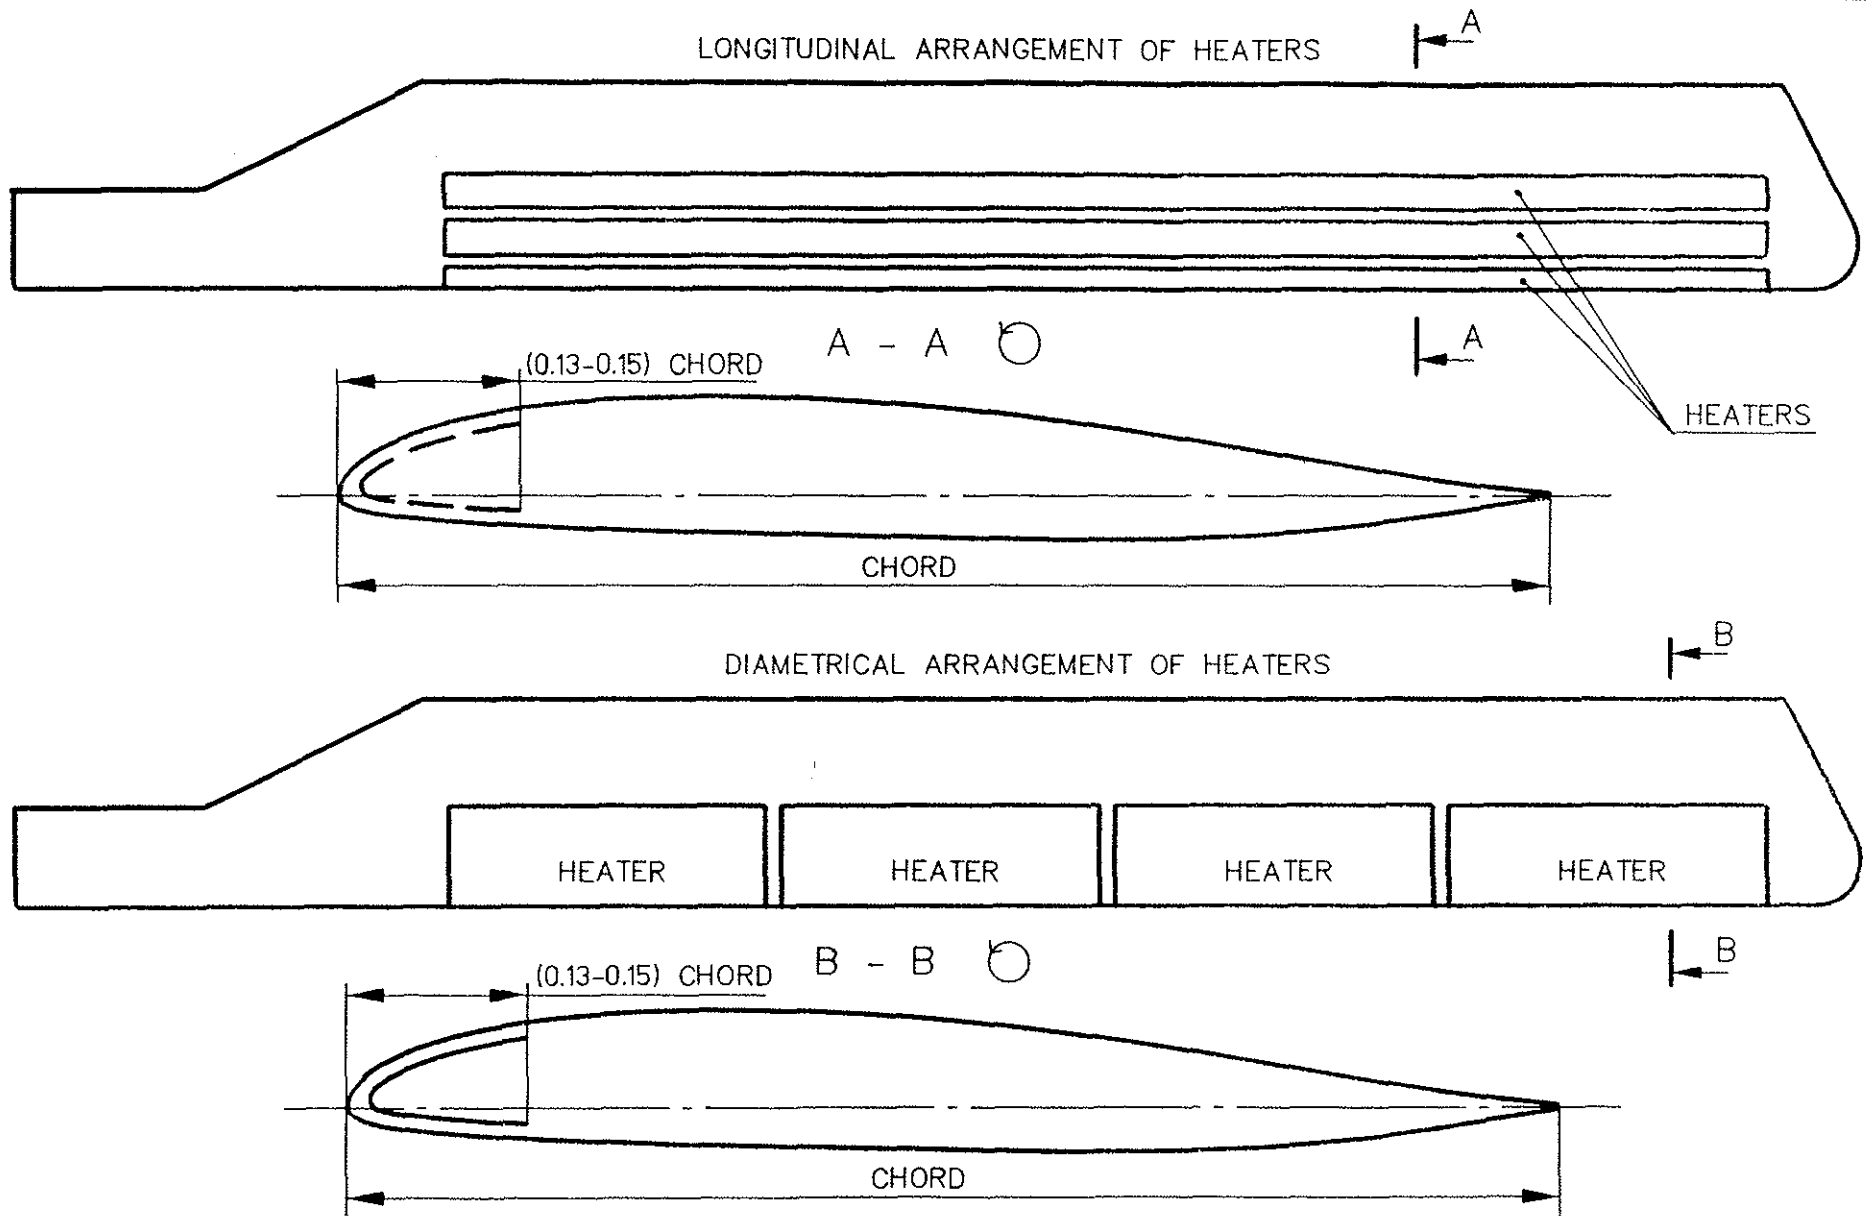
ROTOR BLADE HEATERS ARRANGEMENT
